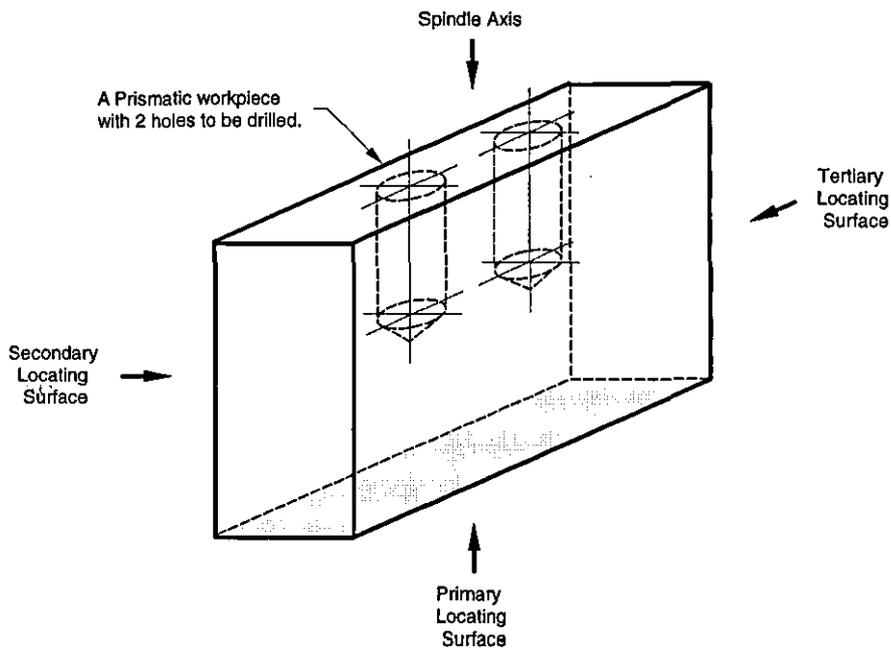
B – A Prismatic Workpiece with Two Blind Holes Using the 3-2-1 Locating Method
